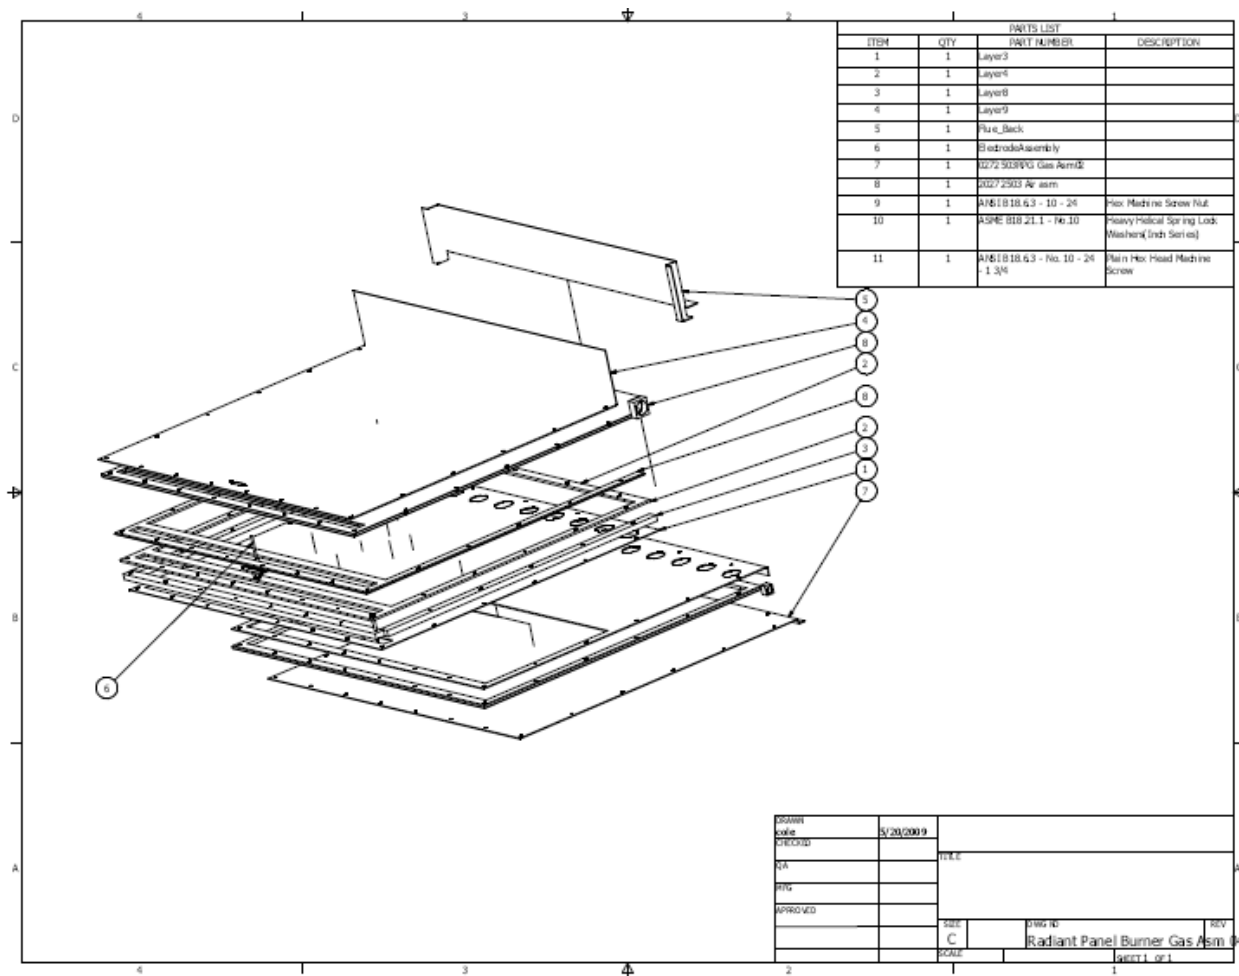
Final Drawing package for the Flat Radiant Panel Burner
